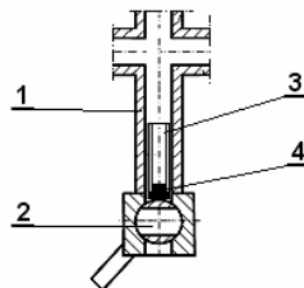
Probe placement scheme: 1 – pipe of device, 2 – lower ball valve, 3 – probe pipe, 4 – probe plug
